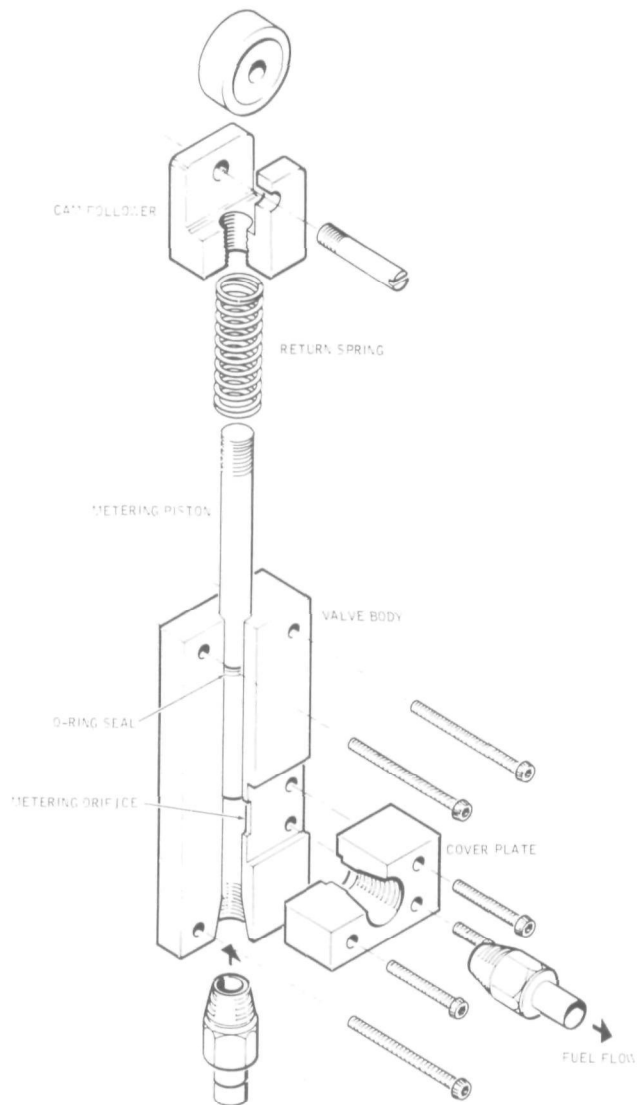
EXPLODED VIEW OF FUEL VALVE
